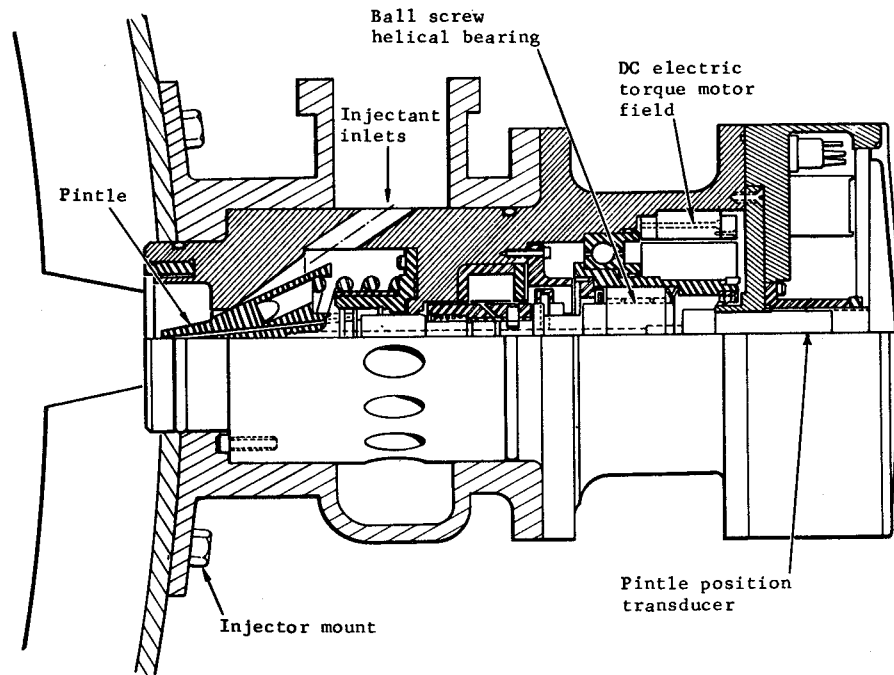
Cross section drawing of an electromechanical injectant valve.
